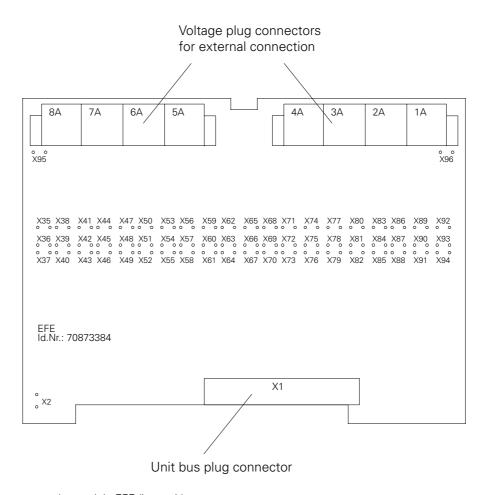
Location of the jumpers on the module EFE (bay unit)
